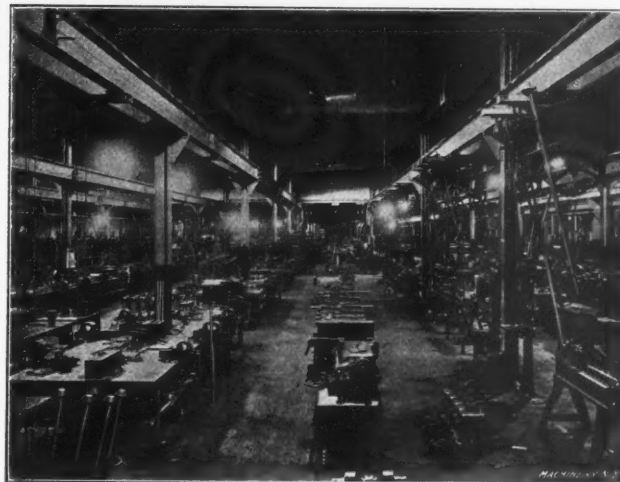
Photograph taken at Night—Building illuminated only by Cooper-Hewitt Lamps
